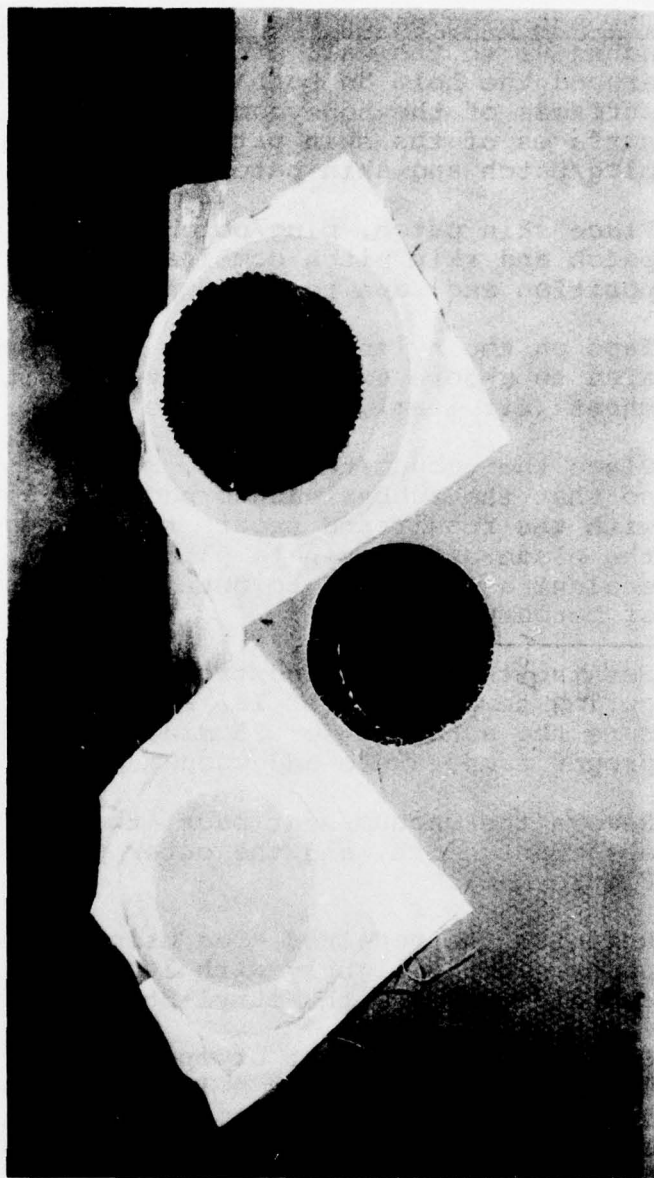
Plug/patch and skin patch combination ready for assembly.
